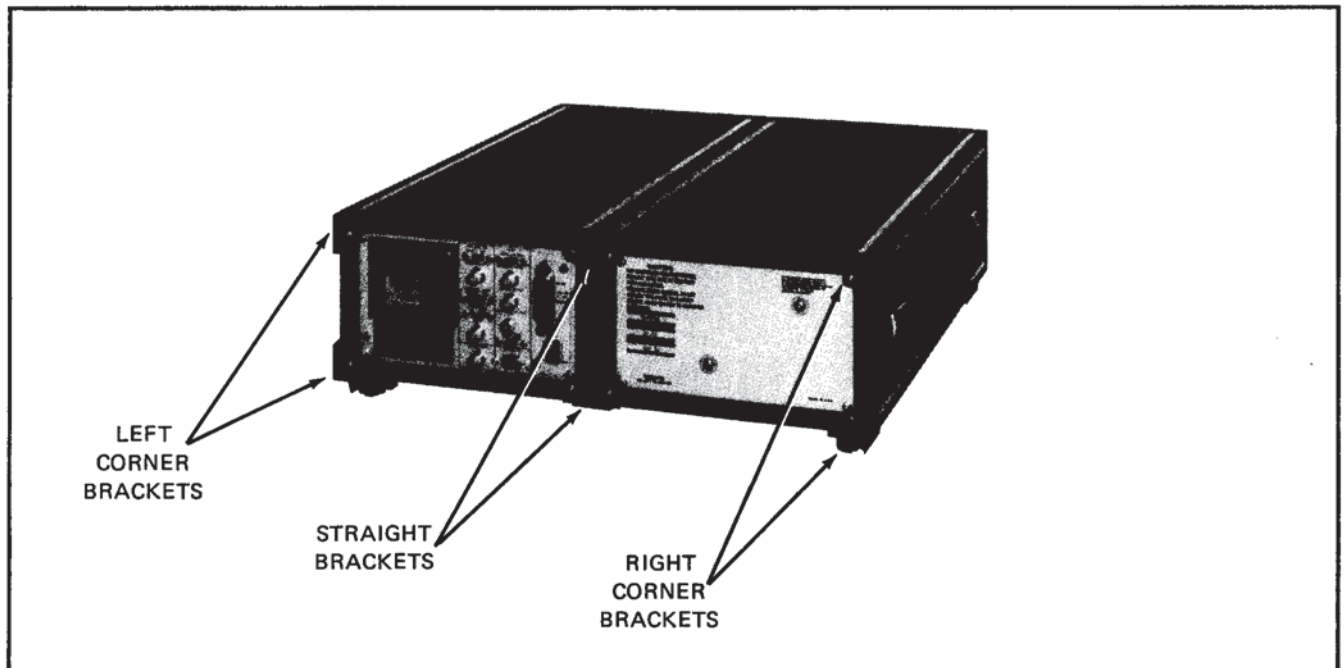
Rear Panel Brackets, 560A Horizontal Chassis
